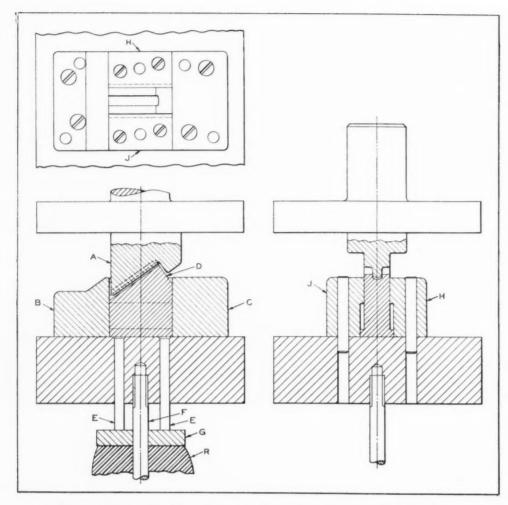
Die for Final Bending and Forming Operations on Part W, Fig. 1
